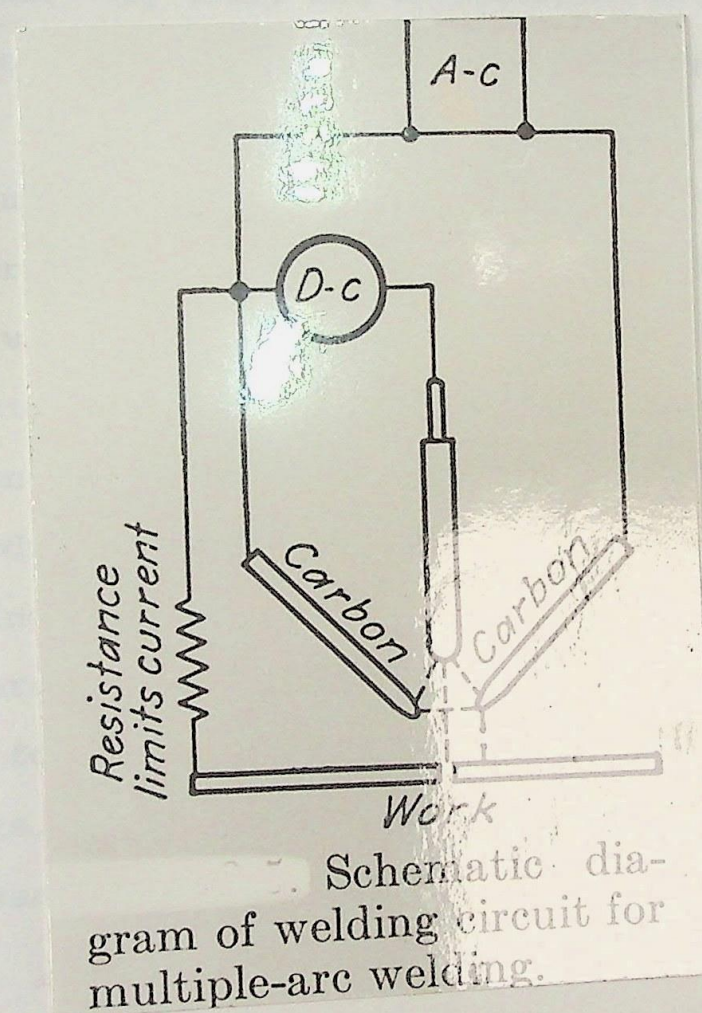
B Schematic diagram of welding circuit for Multiple-arc welding.
